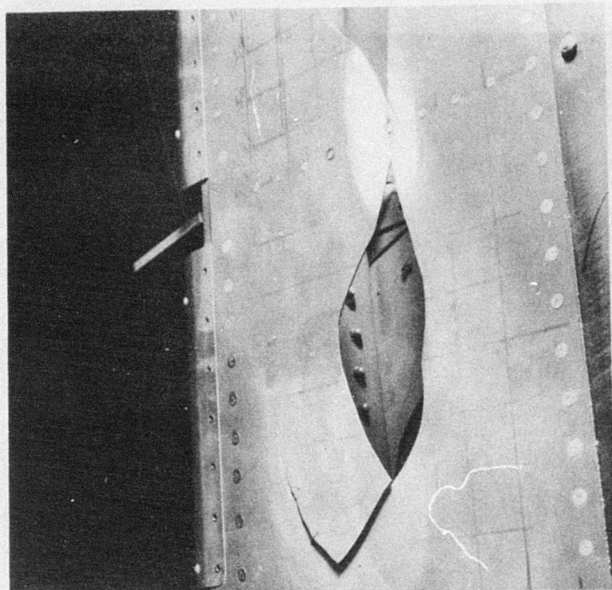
Left Side of Rudder After Acoustic Fatigue Tests Showing Extent of Crack
